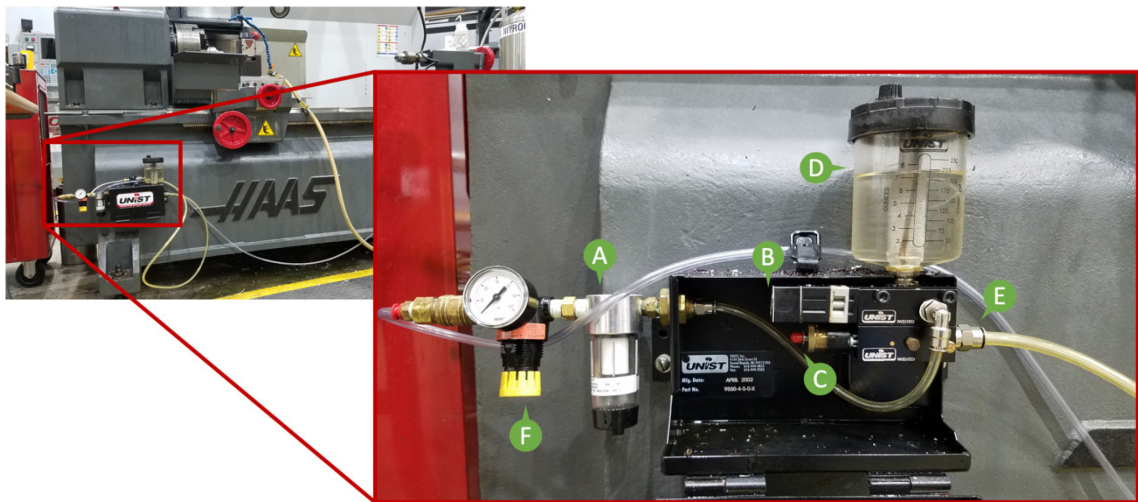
Unist Coolubricator™ MQL system on Haas TL-2 CNC lathe
